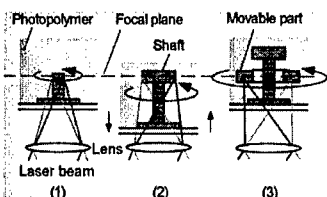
Assembly-free, single-step fabrication process of movable microstructures
